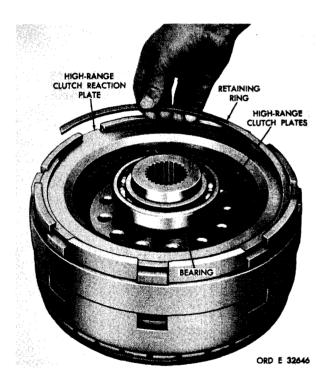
Removing (or installing) retaining ring that retains high-range clutch reaction plate
